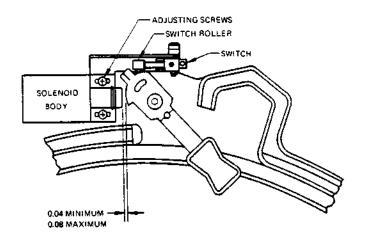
Retracted Solenoid Plunger and Lock-Arm Clearance
